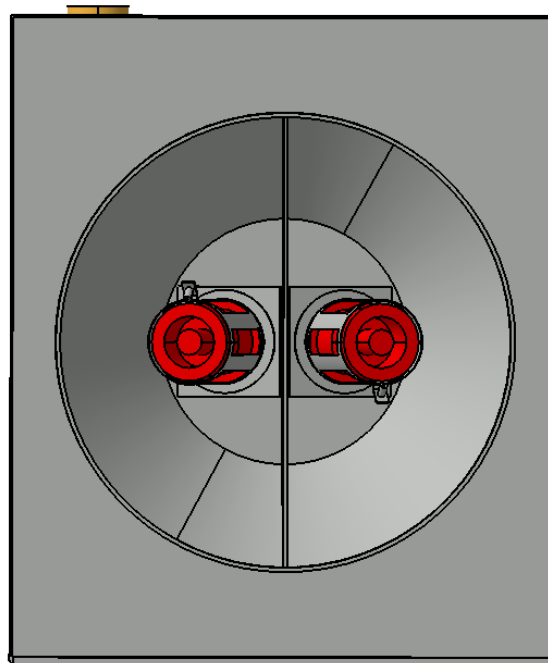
Internal view of the platform, in front of the *thrusting module*.
